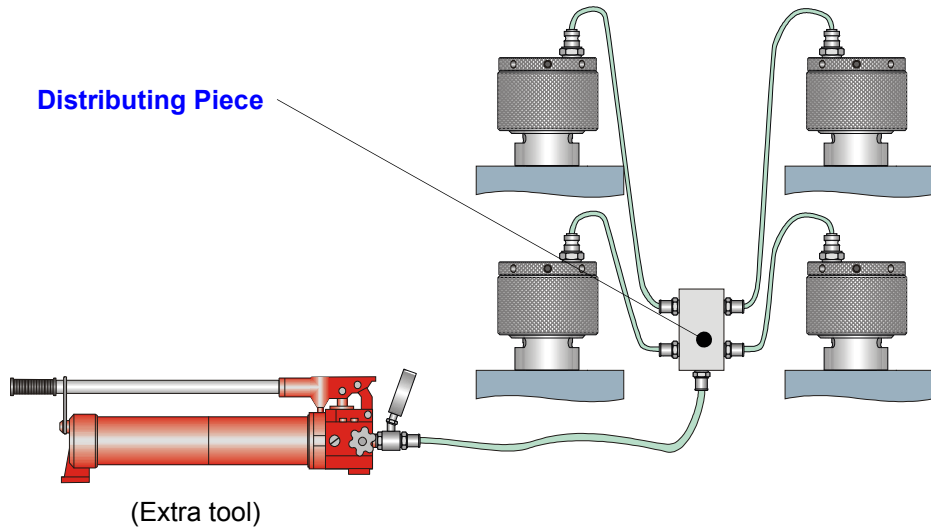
Hydraulic tightening tool set with 4 ports distributing piece
